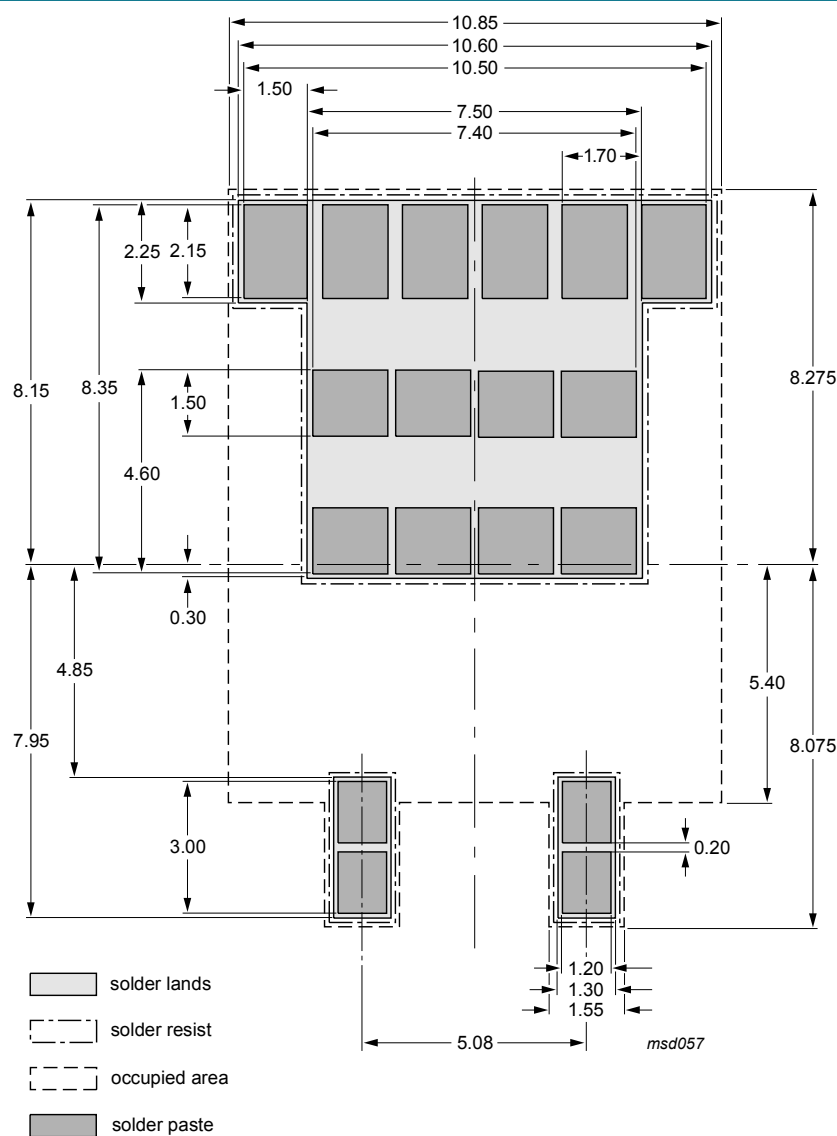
Reflow soldering footprint for D2PAK (SOT404)
